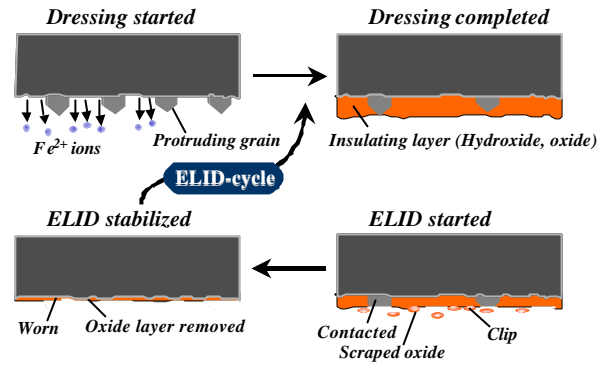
Schematic illustration of ELID-grinding mechanism⁽¹⁾
